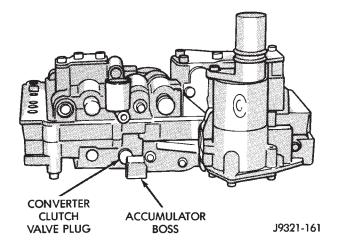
Seating 3-4 Accumulator On Lower Housing—46RH
